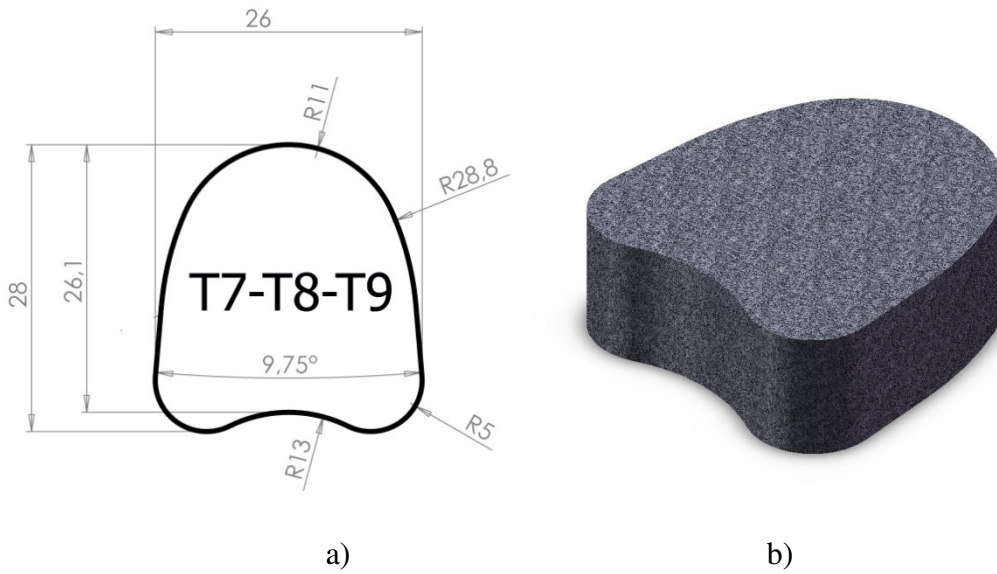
a) Technical drawing and b) solid model of spinal cage belongs to T7-T8-T9 vertebra segments.
